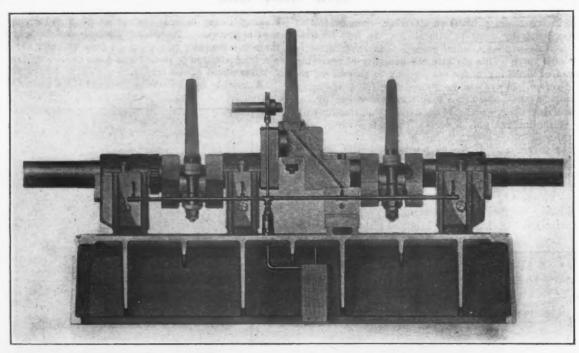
Section Showing the Forced Feed Lubricating System.
